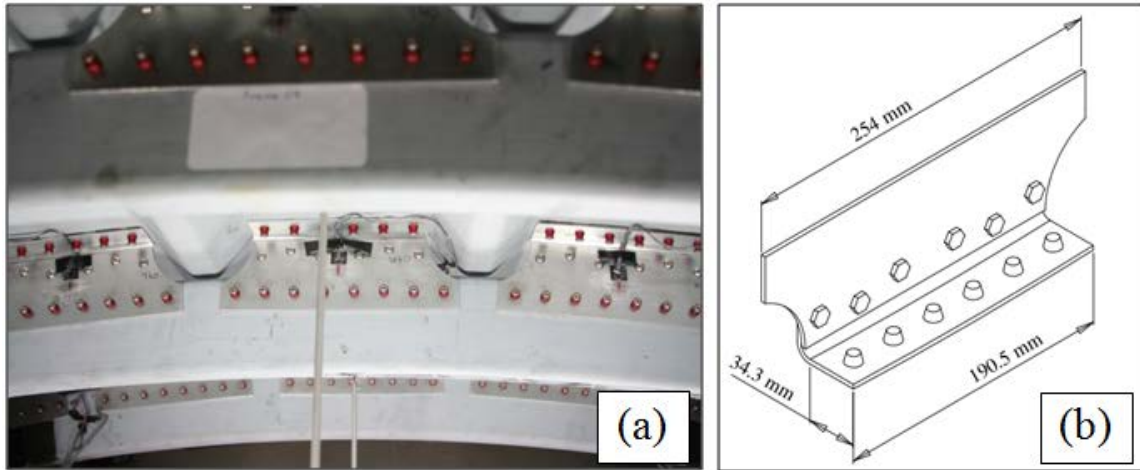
The aluminum 7075 shear ties (a) mounted to the Frame04 panel, and (b) overall dimensions
